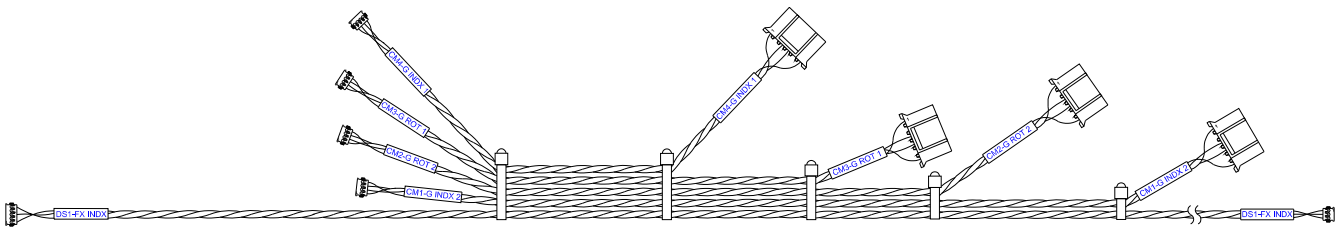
VL4000 BeamWash Gobo Bulkhead 1 Cable Assembly
